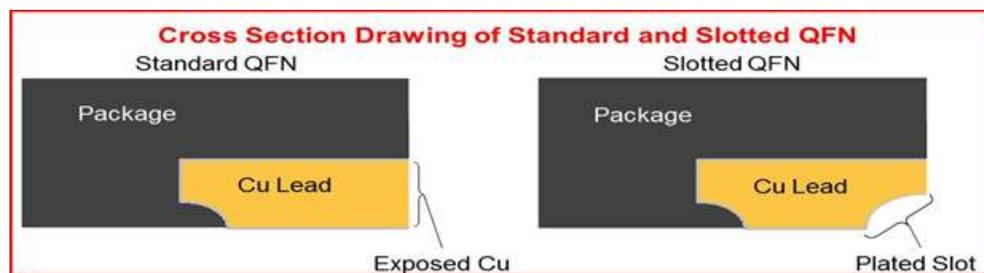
Cross-section Comparison between a Standard QFN and a Sawn-and-plated QFN with Wettable Flanks
